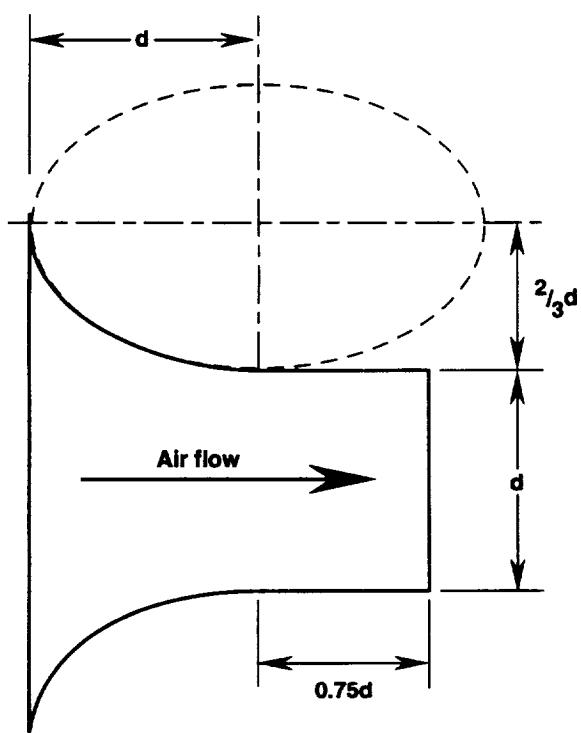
American Society of Mechanical Engineers (ASME) long-radius nozzle definition.
